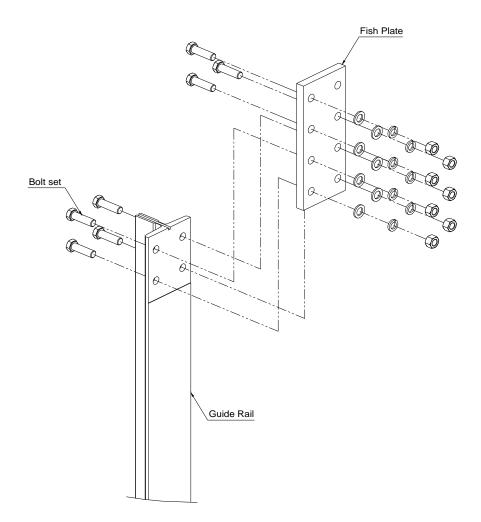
B. FISH PLATE TEMPORARY ASSEMBLY
